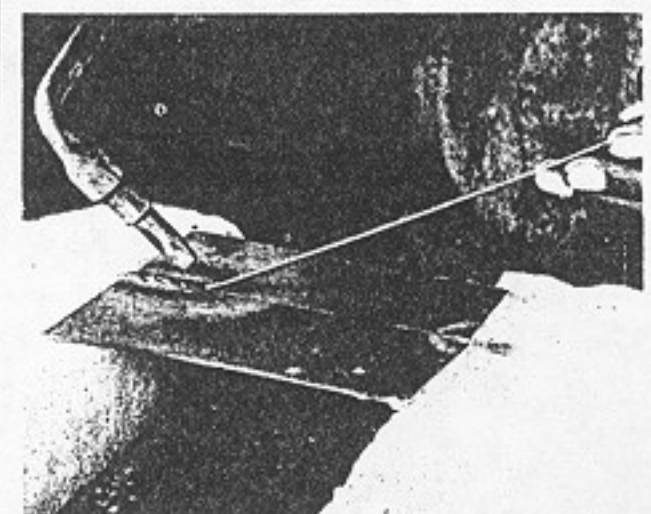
The addition of metal from a filler rod, as shown here, makes possible a stronger joint.
